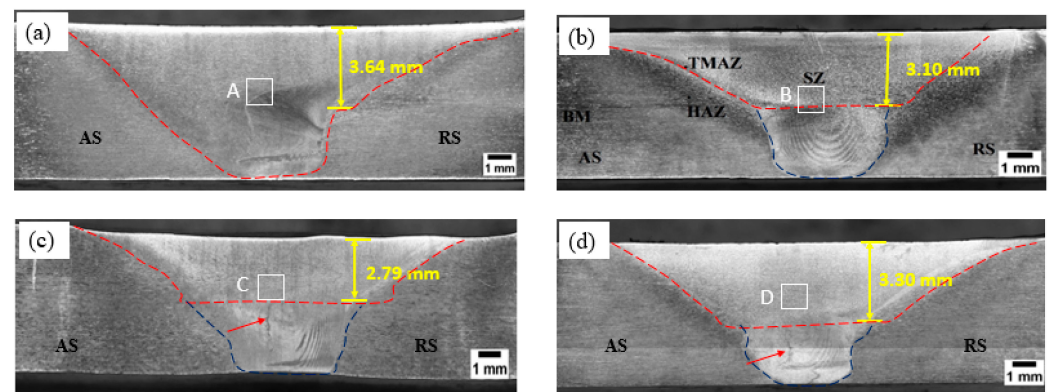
Weld macroscopic images of a friction-stir-welded sample: (a) IA, (b) WR, (c) WC, (d) WH.
